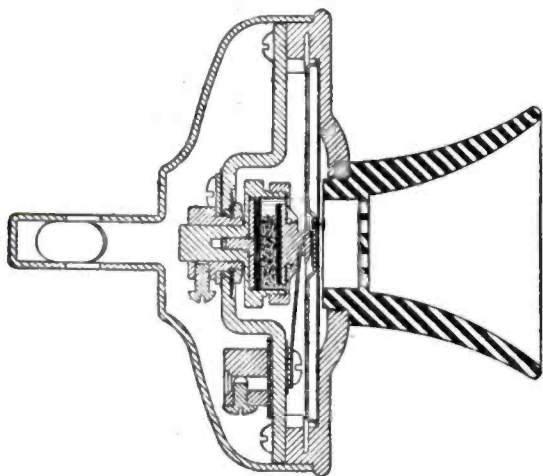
A cross sectional view of a telephone transmitter showing details of construction.
